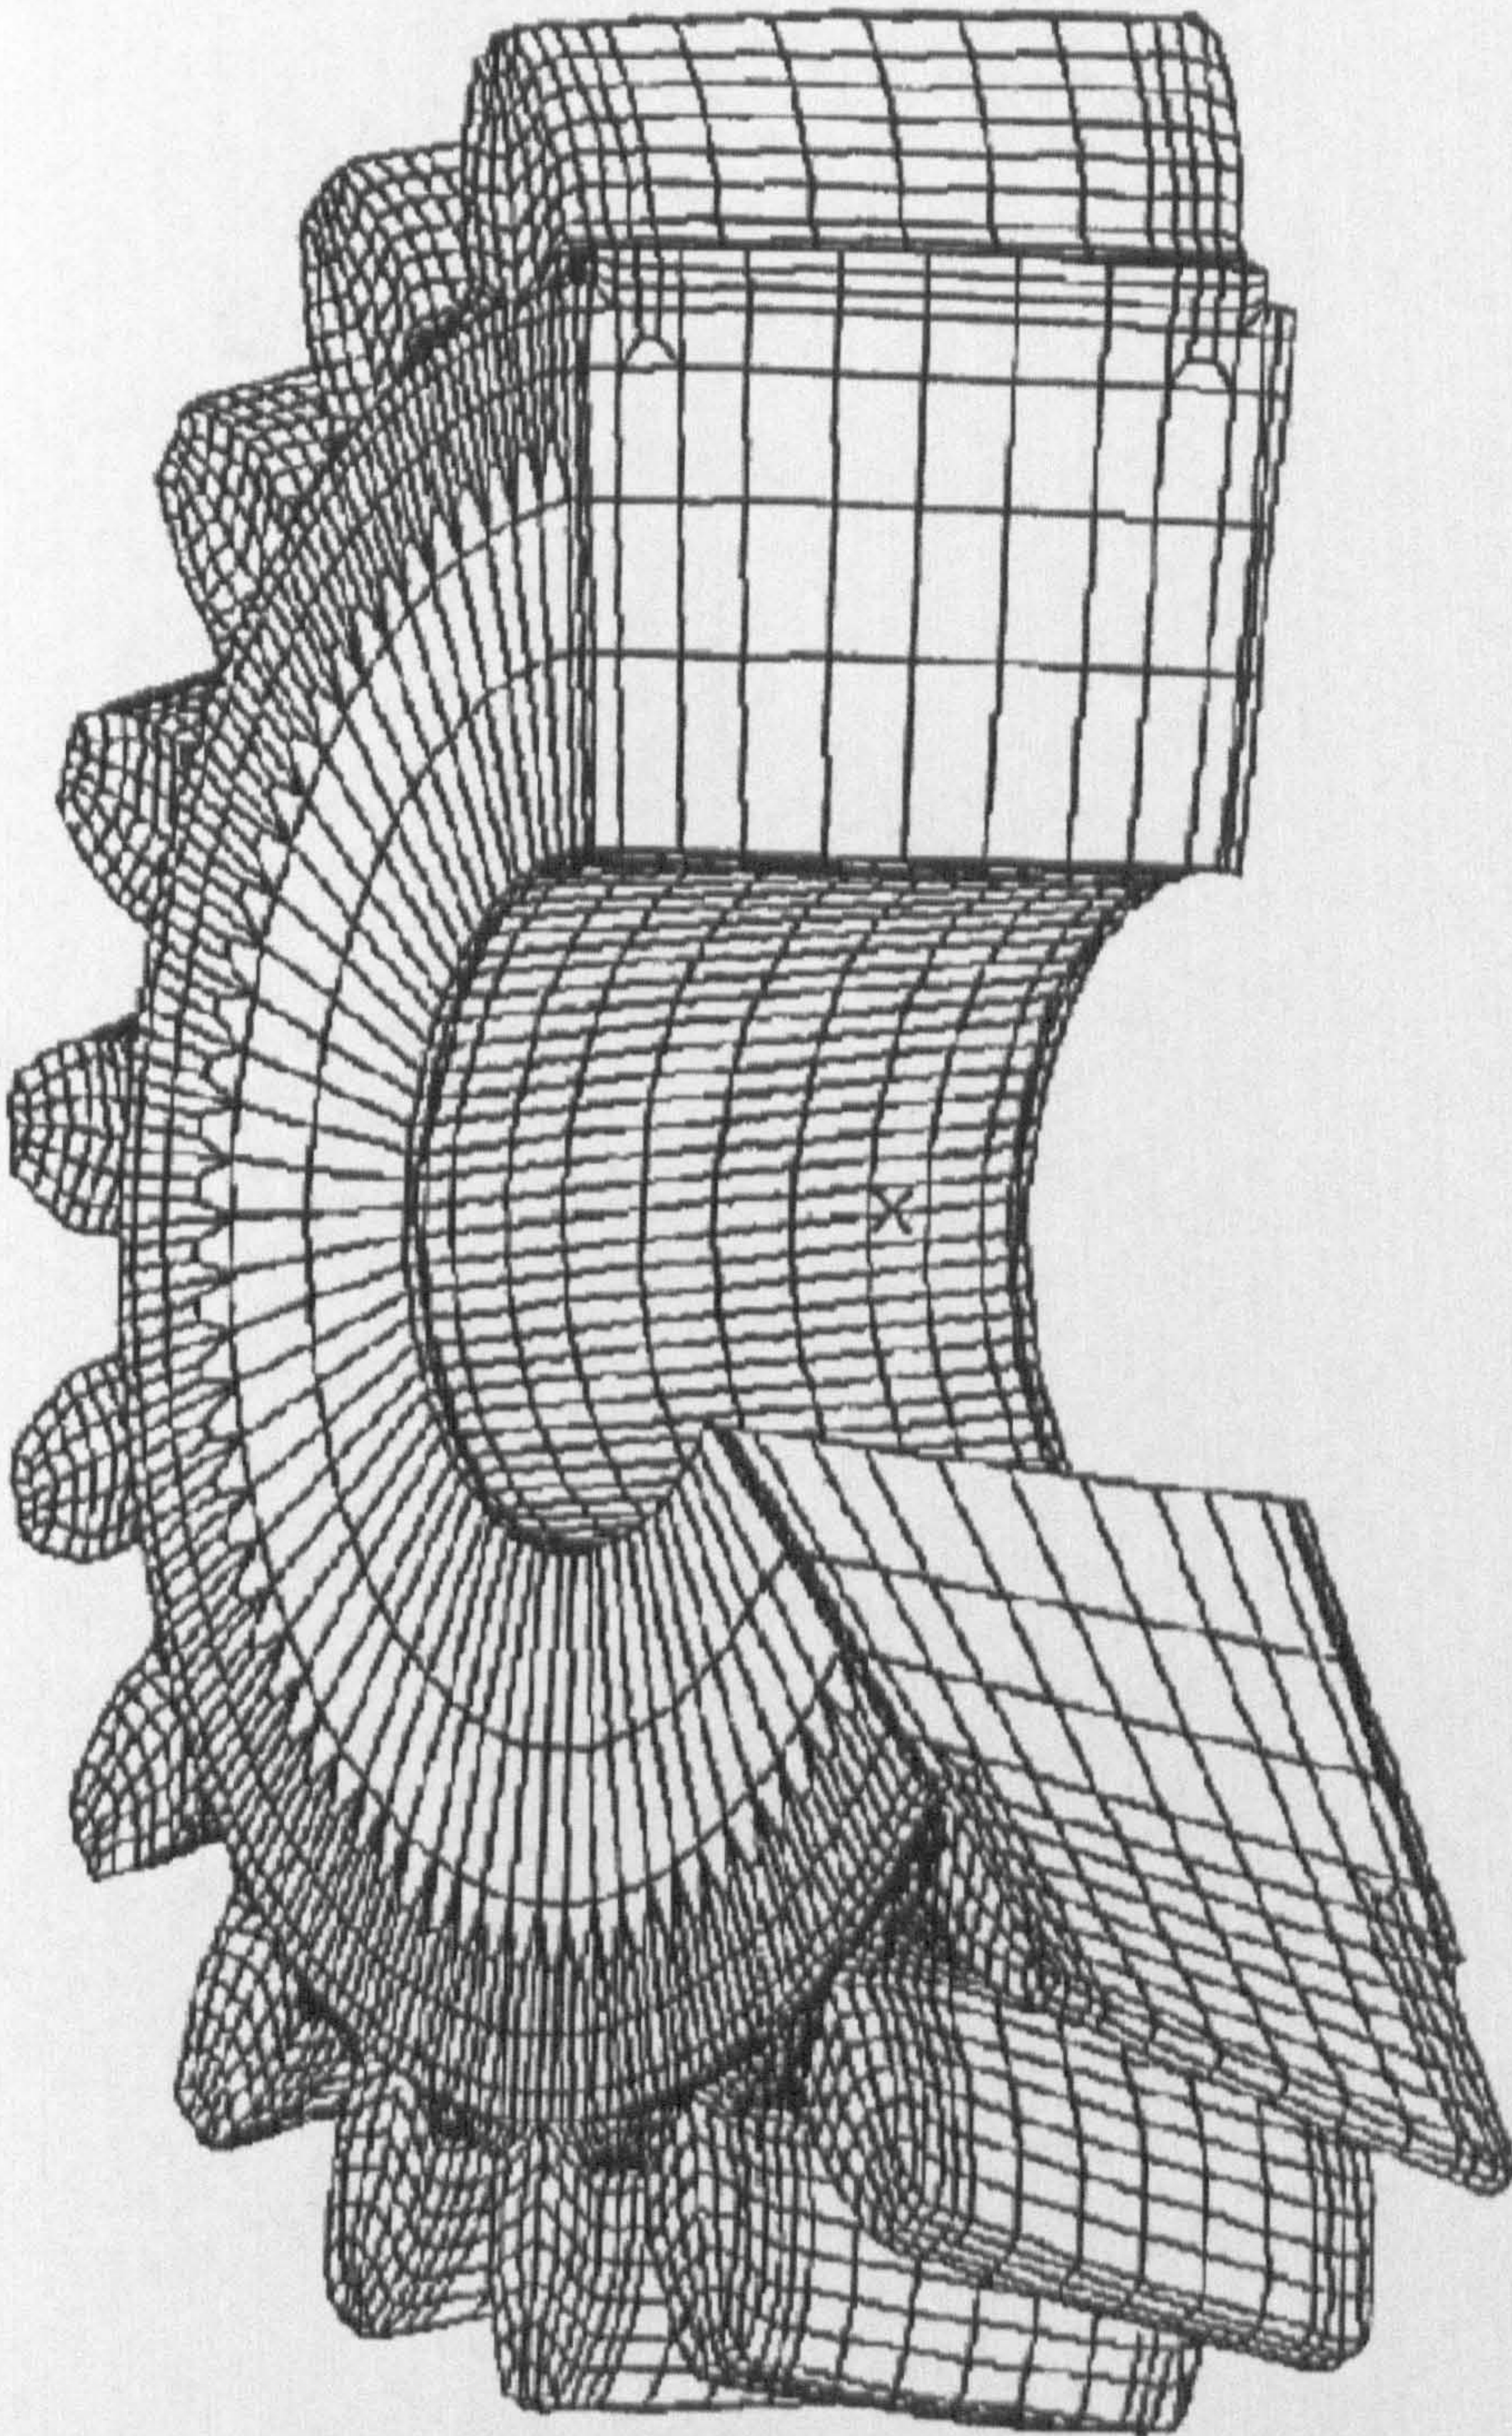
Three-dimensional simulation of cold forging helical gear [29]
